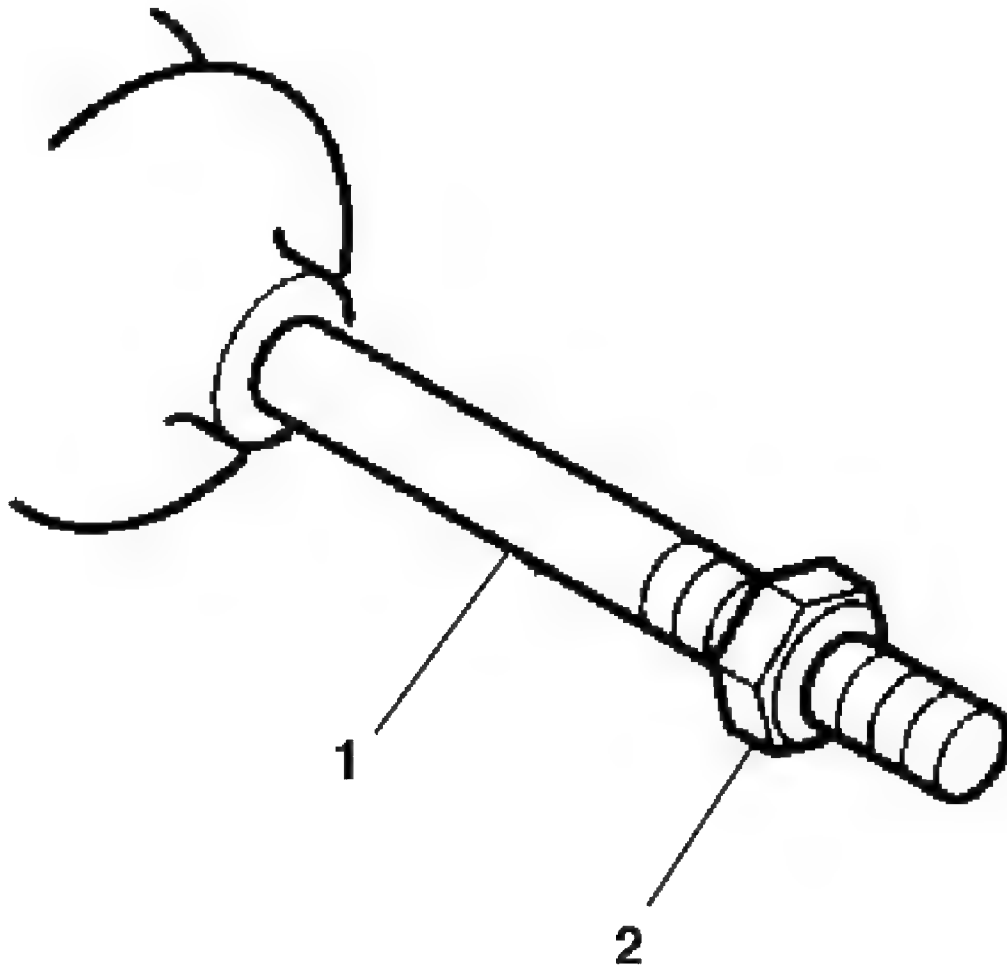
Identifying Inner Tie Rod Assembly Jam Nut
